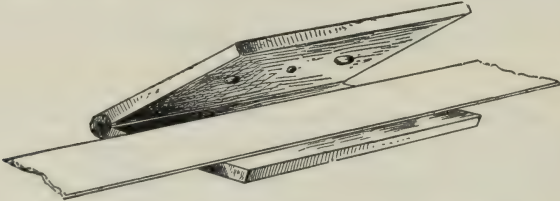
The steel strip inserted in the hinge prior to punching.
